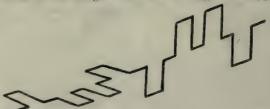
Diagram of the crankshaft of an eight-cylinder all-in-line engine.
